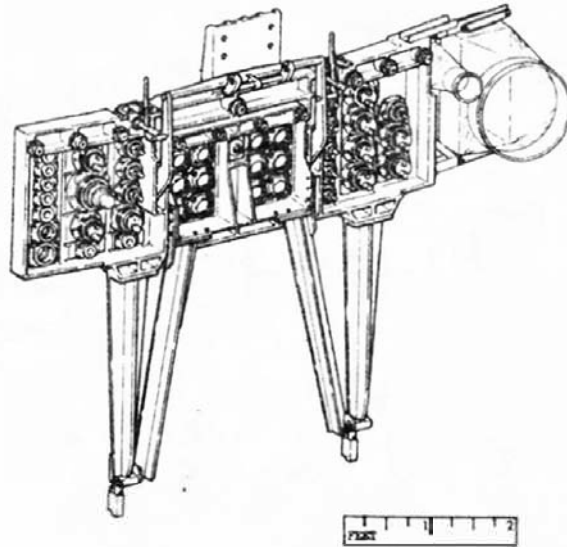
Umbilical Disconnect Arm 3A Carrier Plate Assembly (A7-41)
